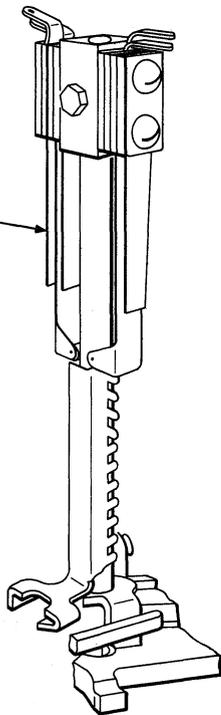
Normal Post Spring Assembly Operated by Normal Post Cam and Rollers
